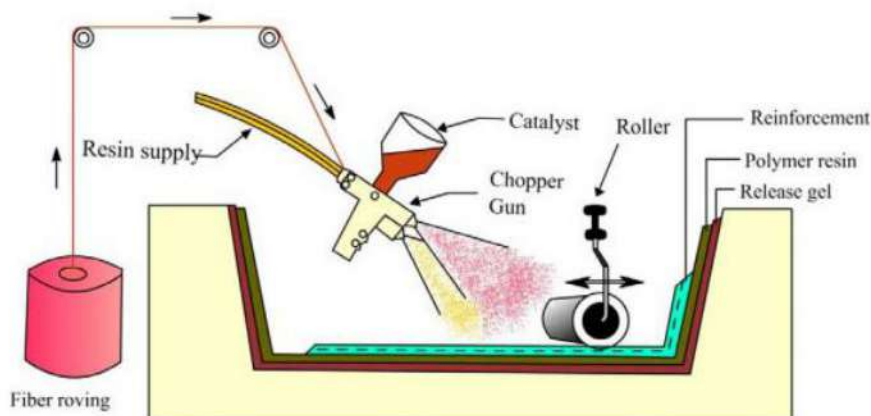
8: Illustration shows the process behind the open molding hand lay-up technique [35].
